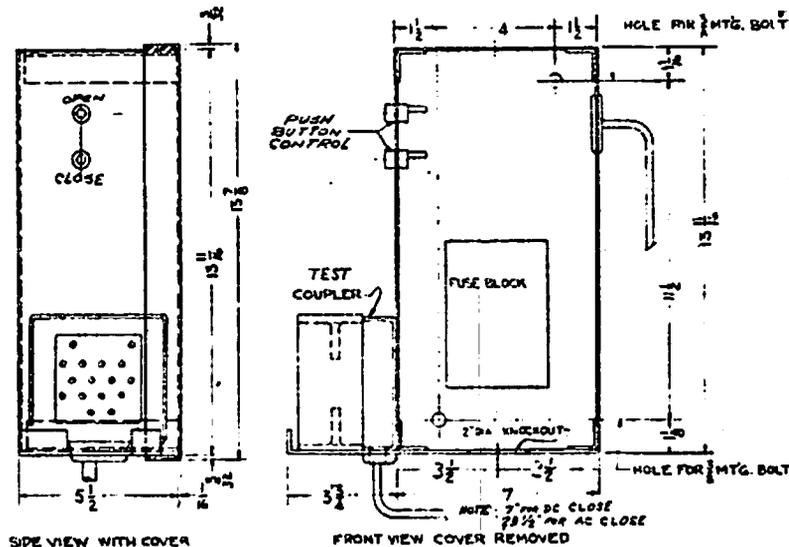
Inspection Box for 13.8 KV Metal-clad Switchgear
